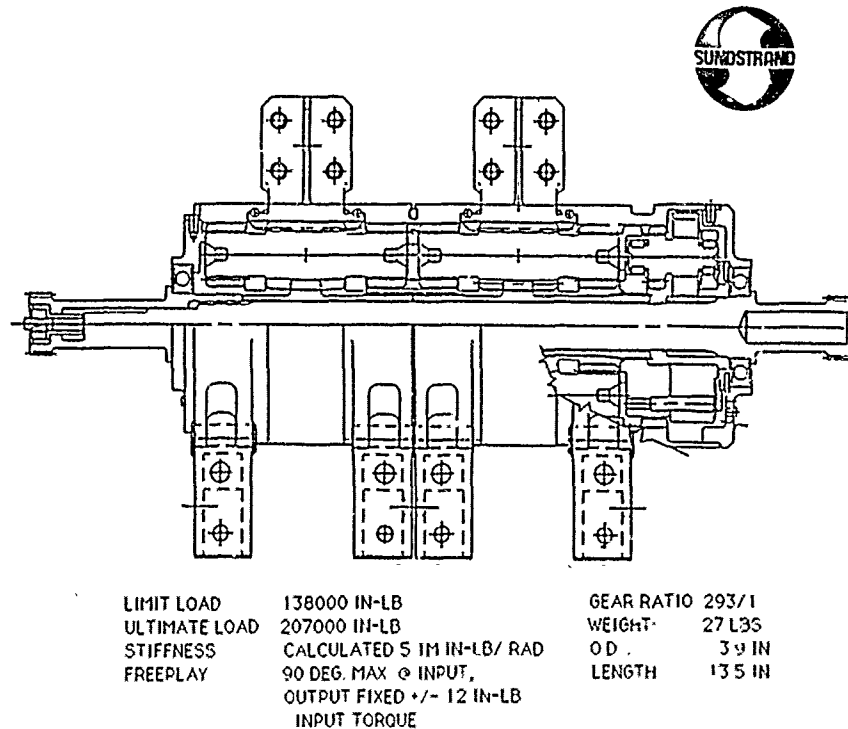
Sundstrand - LEF Actuator Detail Drawing
